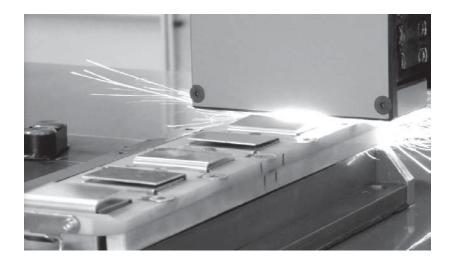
Robotic EMPT sheet welding coil for subassembly manufacturing (Picture shows the "JET-Effect")
